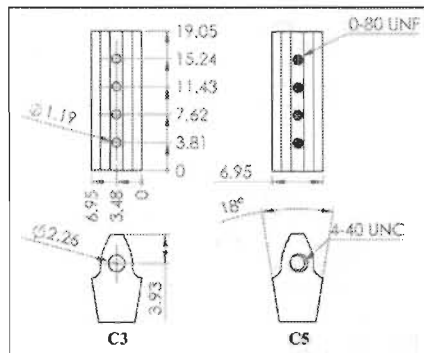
Details of the positions of the cooling holes: configurations C3 (left) and C5 (right). Distances in millimeters.
